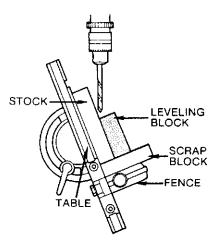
On sharp angles, the side of the bit may contact the workpiece before the bit center does. This can cause the bit to drift off center. A leveling block will solve the problem.
